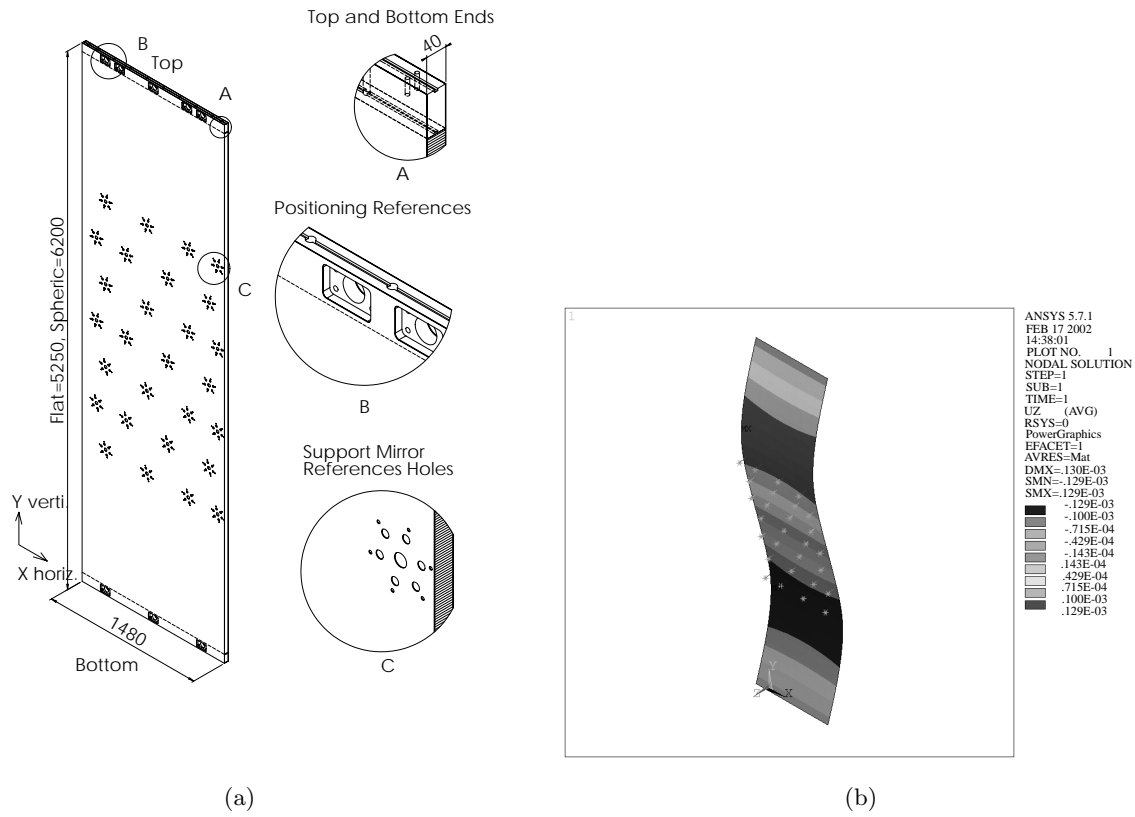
The aluminium honeycomb mirror panel. (a) Honeycomb sandwich panel for holding the mirrors. (b) Static deflection of panel due to mirror weight.
